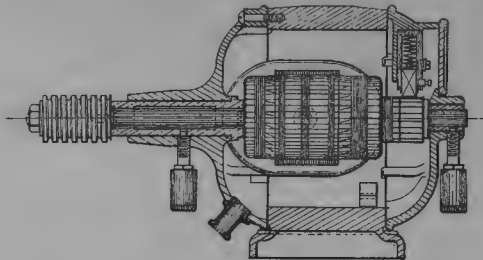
Section of motor traversing, Marks I and II, or motor elevating, Mark II.
